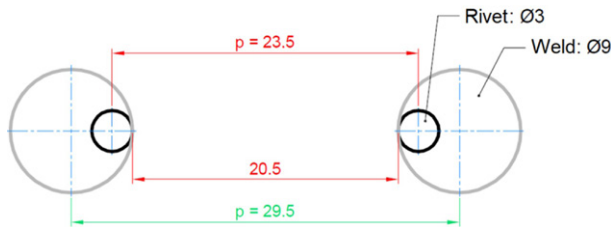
The diagram illustrating the selection of the basic spacing of welds based on the spacing of rivets
